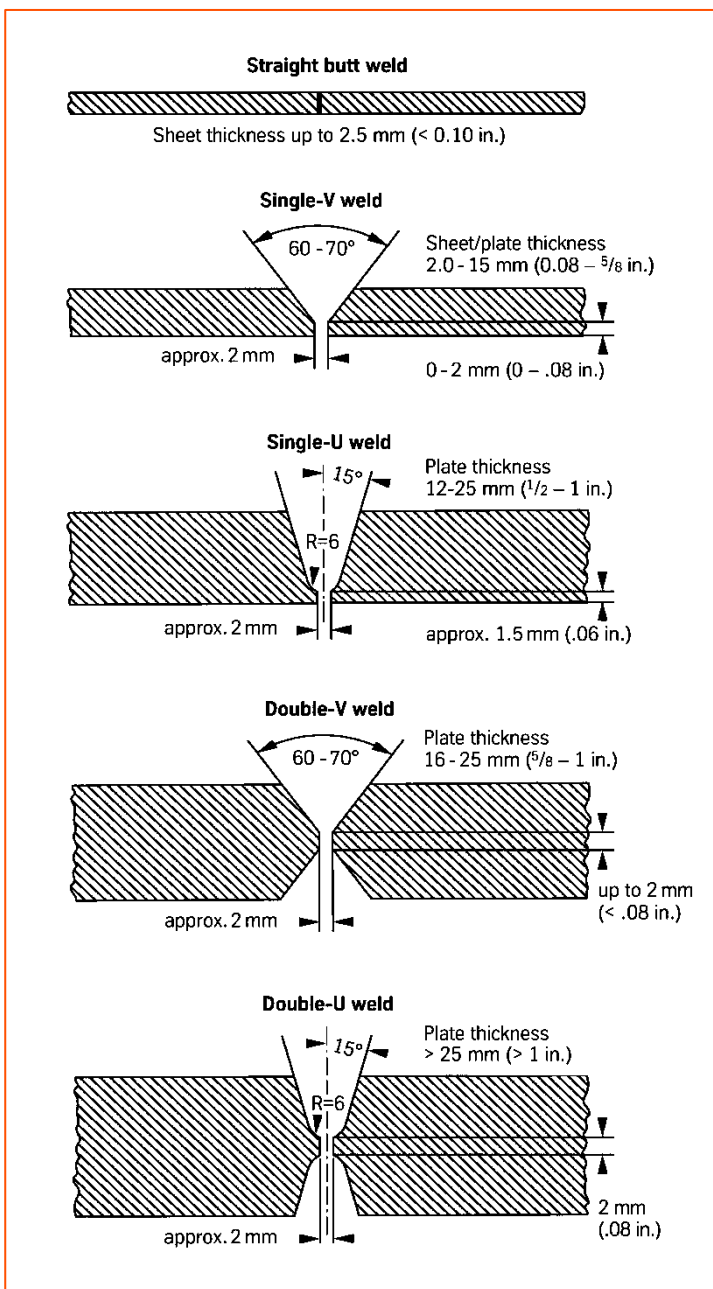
Seam preparation for welding nickel alloys and special stainless steels
